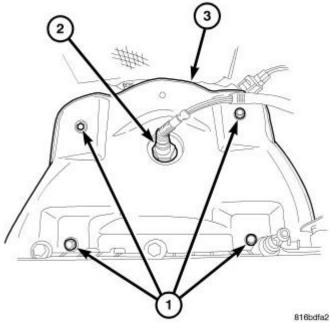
Maniverter Heat Shield & Bolts Courtesy of CHRYSLER GROUP, LLC
